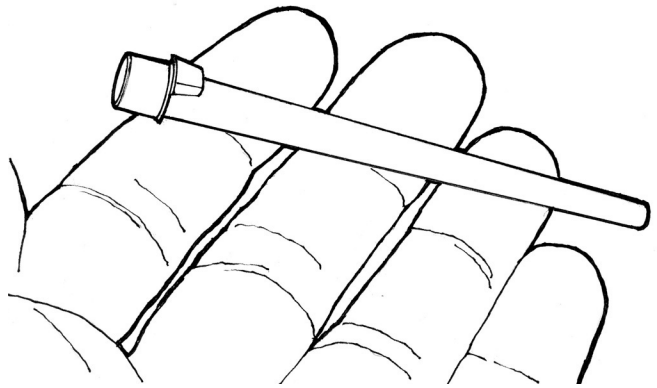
Starting in November, 2013, a gib removal tool is included with each Sherline lathe or mill. The tool is made from a sprue produced in the gib molding process. It is the same material as the gib and will not harm the gib or the machine's metal parts.
